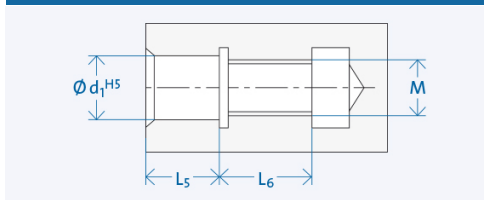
FOR GRINDING WHEELS ON THREADED PIN (PL)\
